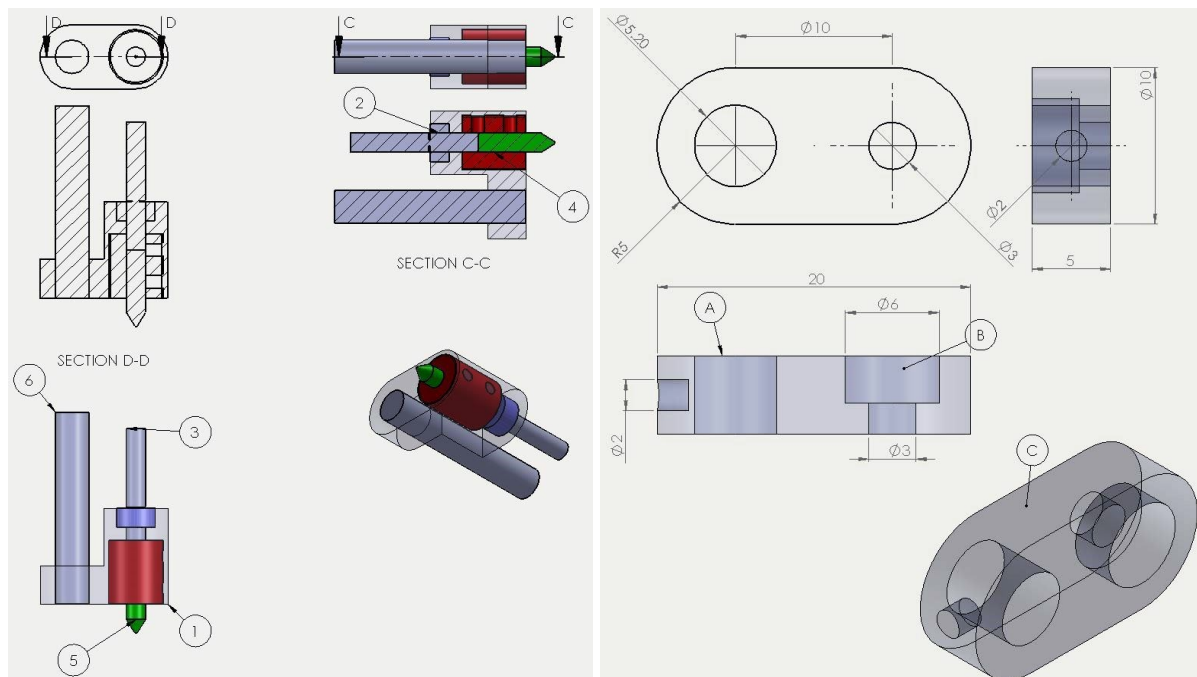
Engineering drawing of the flexible drilling system's connectors: (left) the connector for several parts, (1) the body, (2) bearing, (3) flexible shaft, (4) rotary coupling, (5) cutting burr, (6) retractor, (right) connector that attaches the solid part of the retractor to the other end of the flexible shaft, (A) path of the solid part of the retractor, (B) the position for the bearing that surrounds the flexible shaft, C-connector body.
